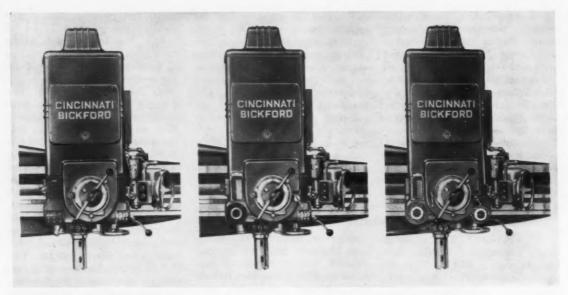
Three new optional heads for Cincinnati Bickford radial drilling machines
